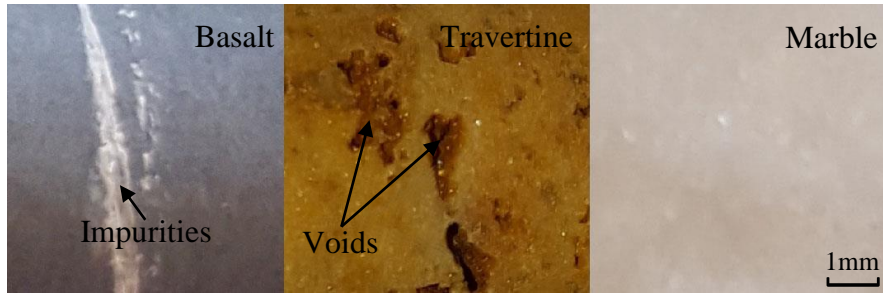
Rock surfaces of machined rods extracted by RUM
